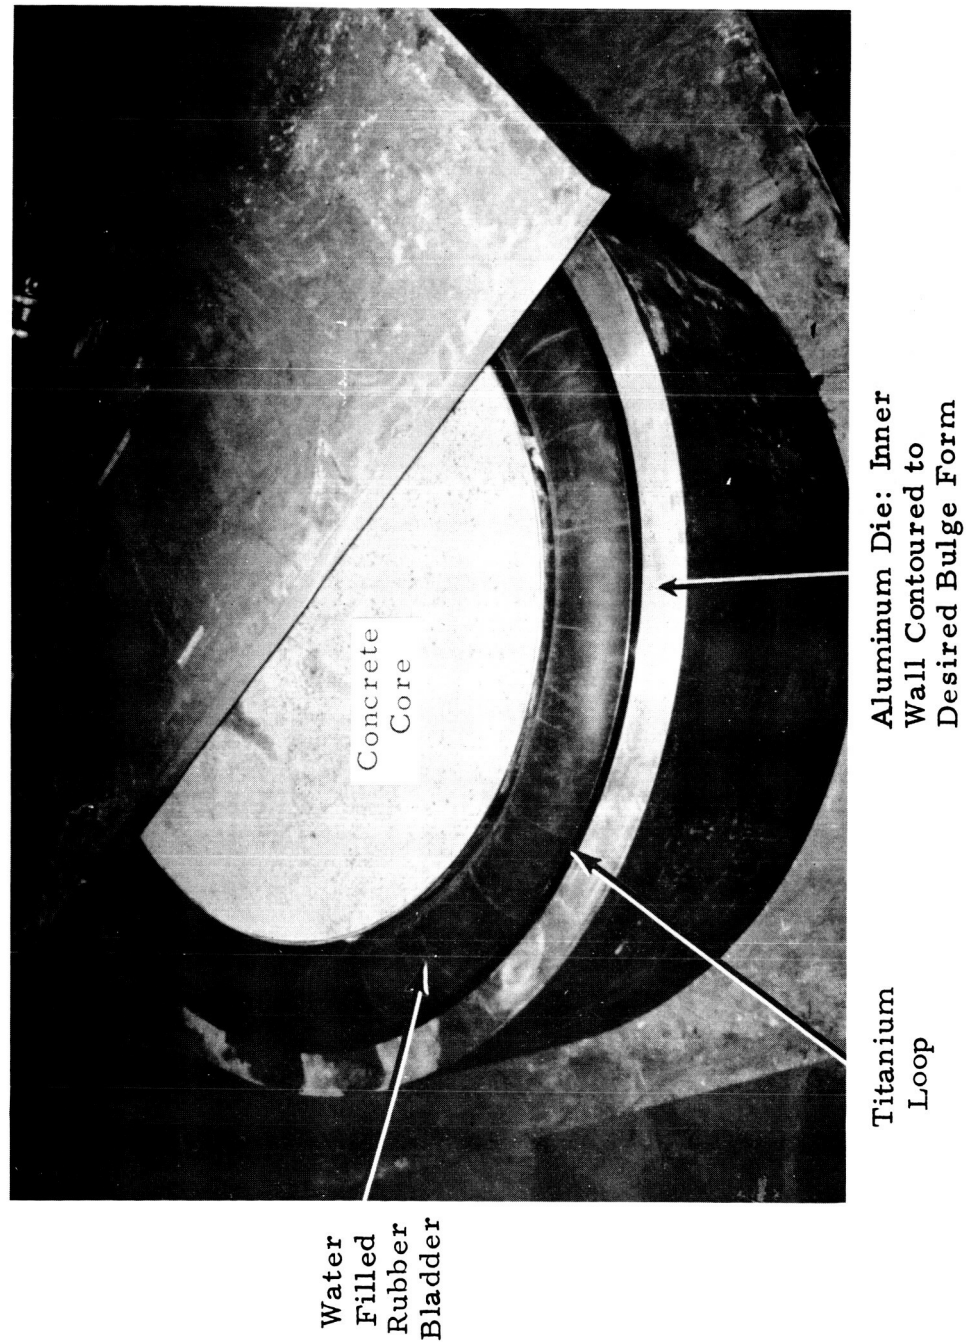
Bulge Forming Tool for Elastic Loop Manufacturing
